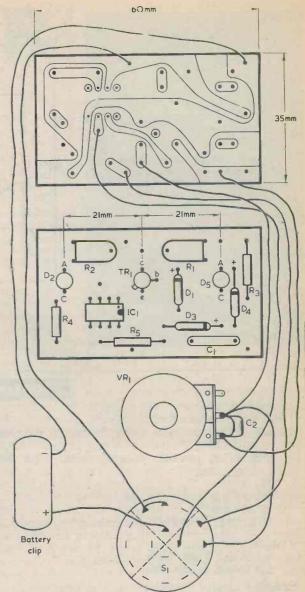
The enlarger meter wiring. The printed board is reproduced full size for tracing. Note that R1 and R2 are mounted, in practice, on the copper side of the board. For reasons of clarity they are shown here on the component side
